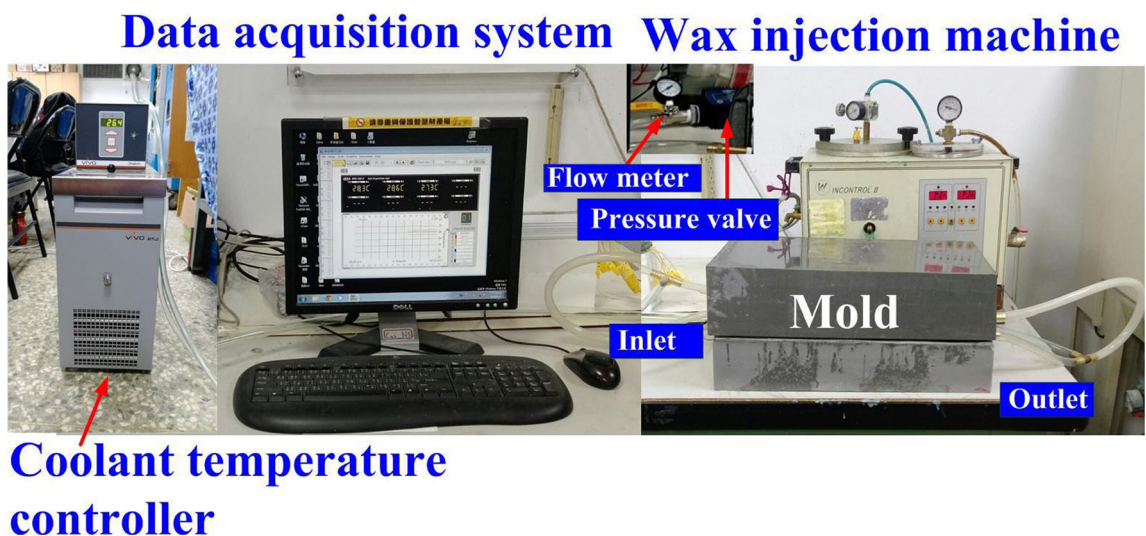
Experimental setup for investigating the cooling efficiency of fabricated injection molds
